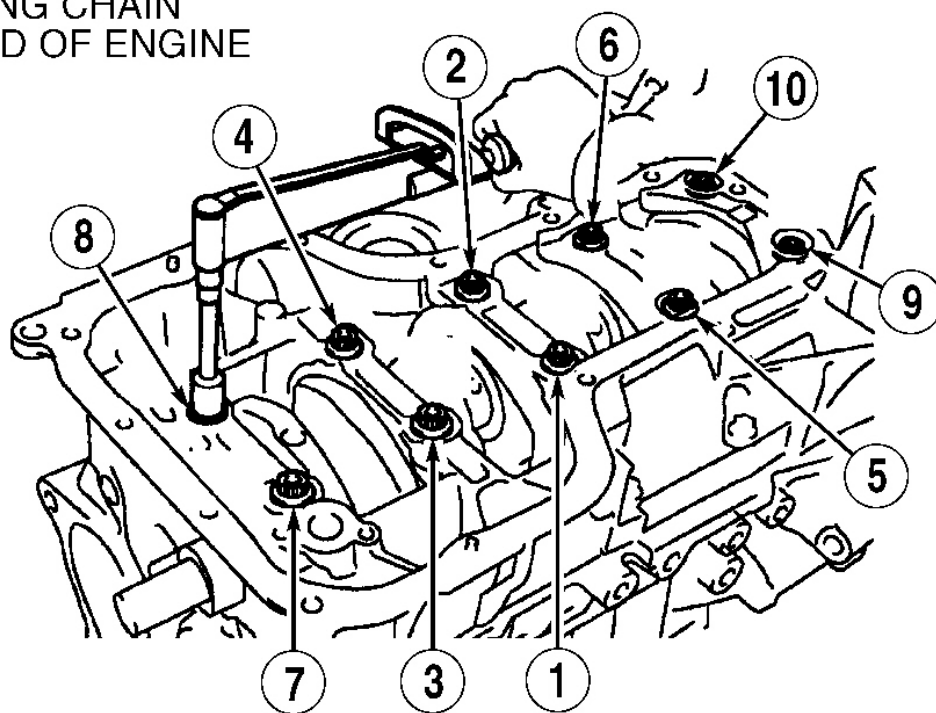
Identifying Camshaft Bearing Cap Tightening Sequence
